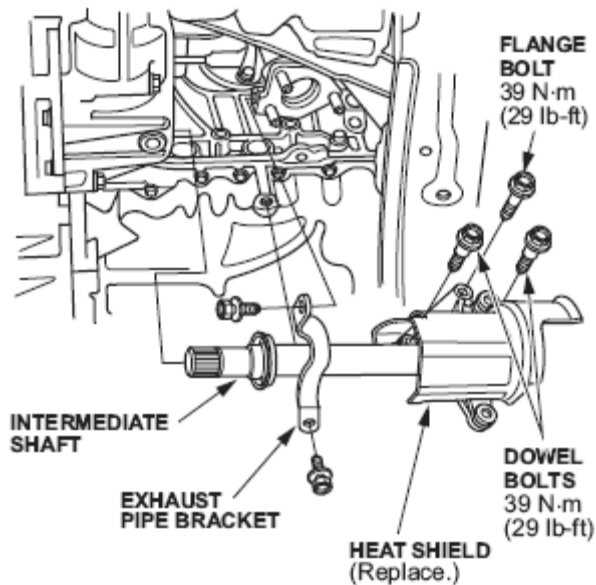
Identifying Intermediate Shaft Bolts & Torque Specifications
